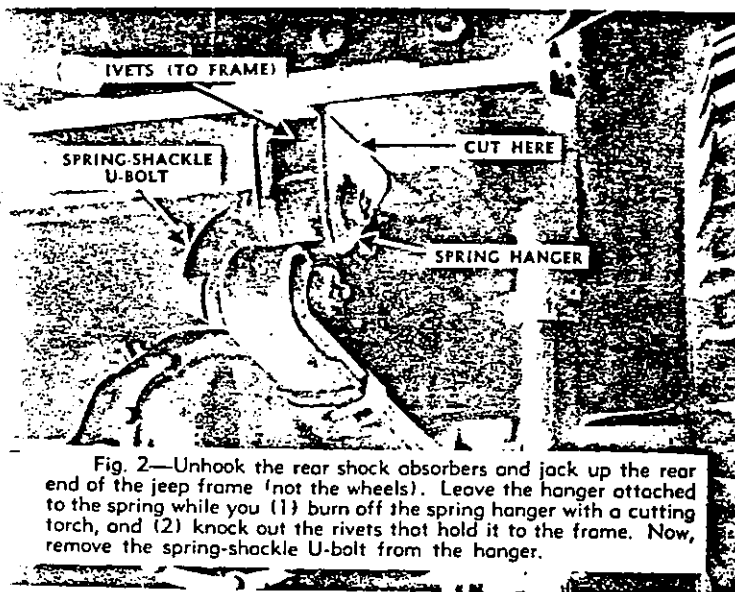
Unhook the rear shock absorbers and jack up the rear end of the jeep frame (not the wheels). Leave the hanger attached to the spring while you (1) burn off the spring hanger with a cutting torch, and (2) knock out the rivets that hold it to the frame. Now, remove the spring-shackle U-bolt from the hanger.
